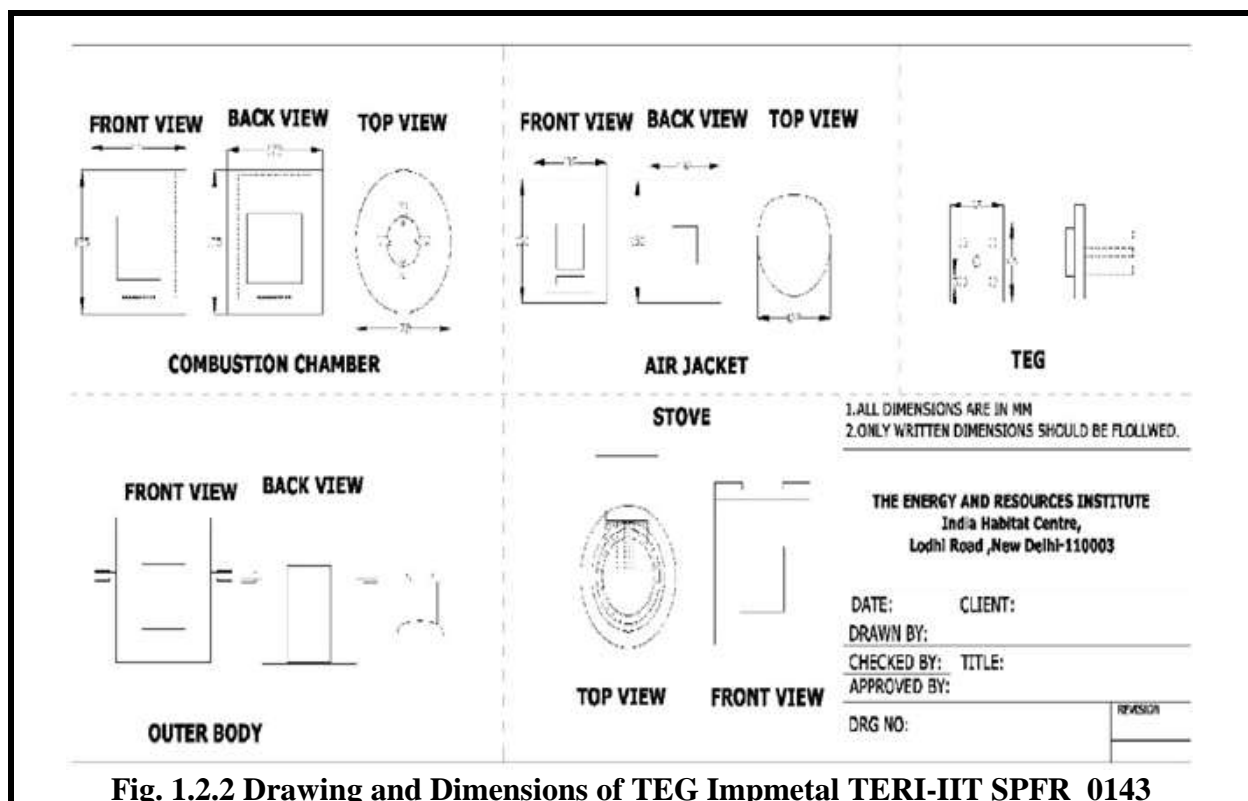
Drawing and Dimensions of TEG Impmetal TERI-IIT SPFR\_0143
